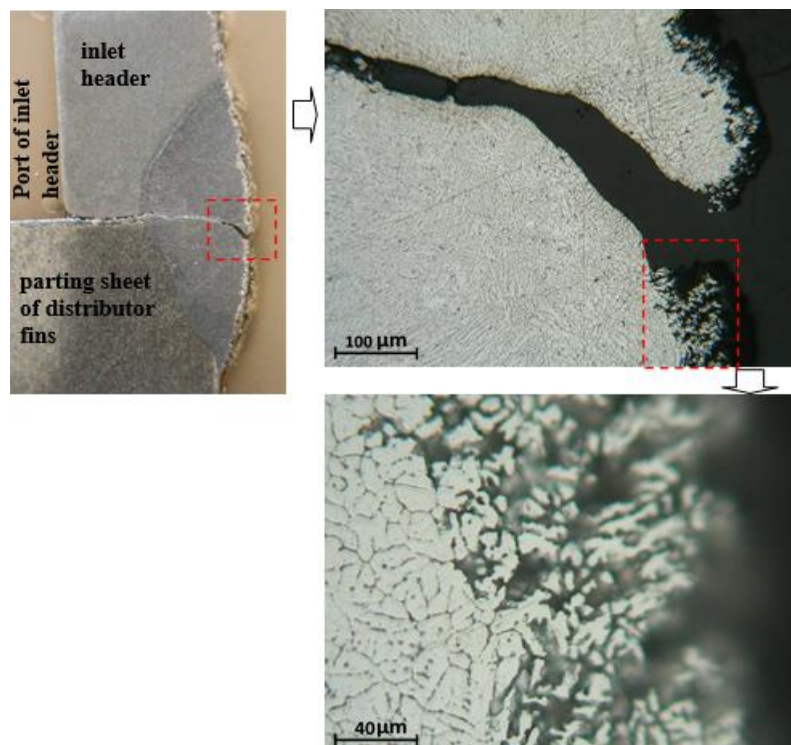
Microstructure obtained from the weld joint between header and parting sheet of distributor fins at location as indicated (etched with Keller solution)
